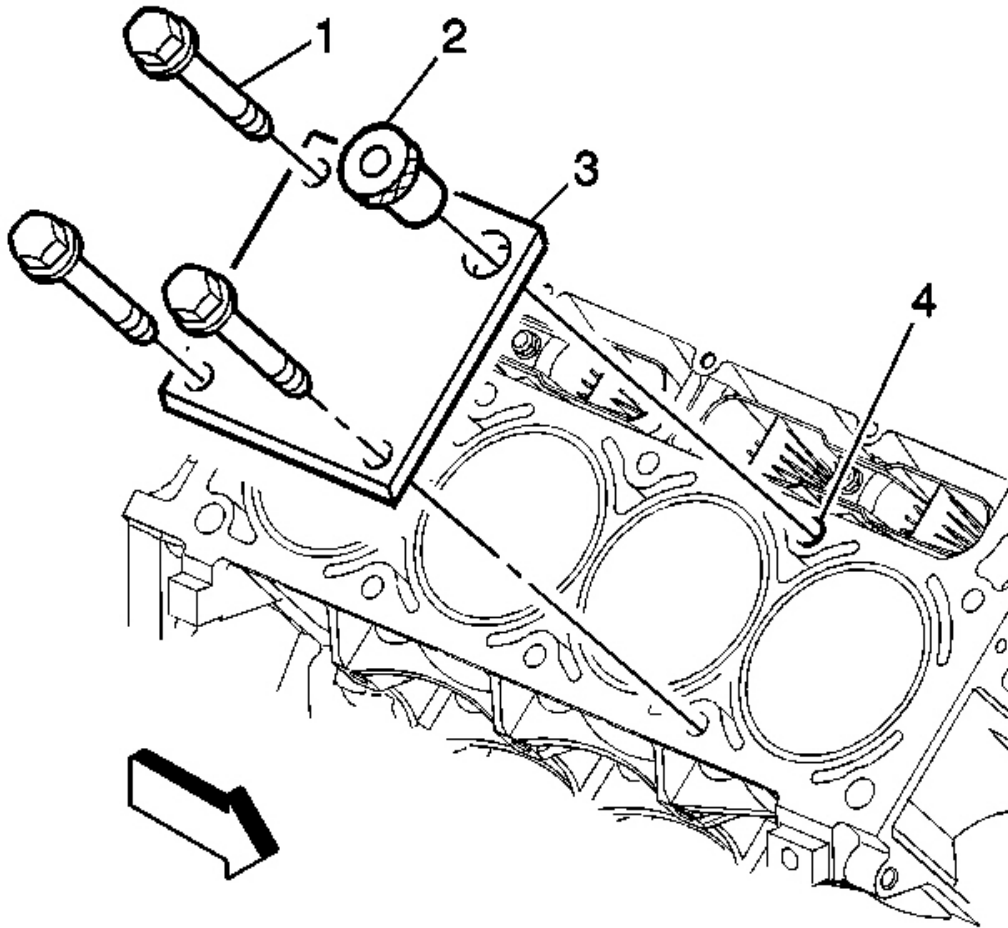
View Of Fixture Plate, Bolts, Bushing & Cylinder Hole
